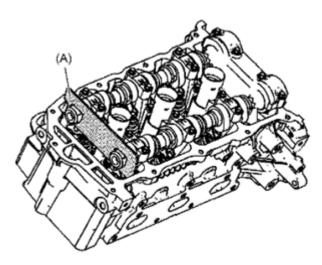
Removing Special Tool From Camshaft (Bank 1) Courtesy of SUZUKI OF AMERICA CORP.
